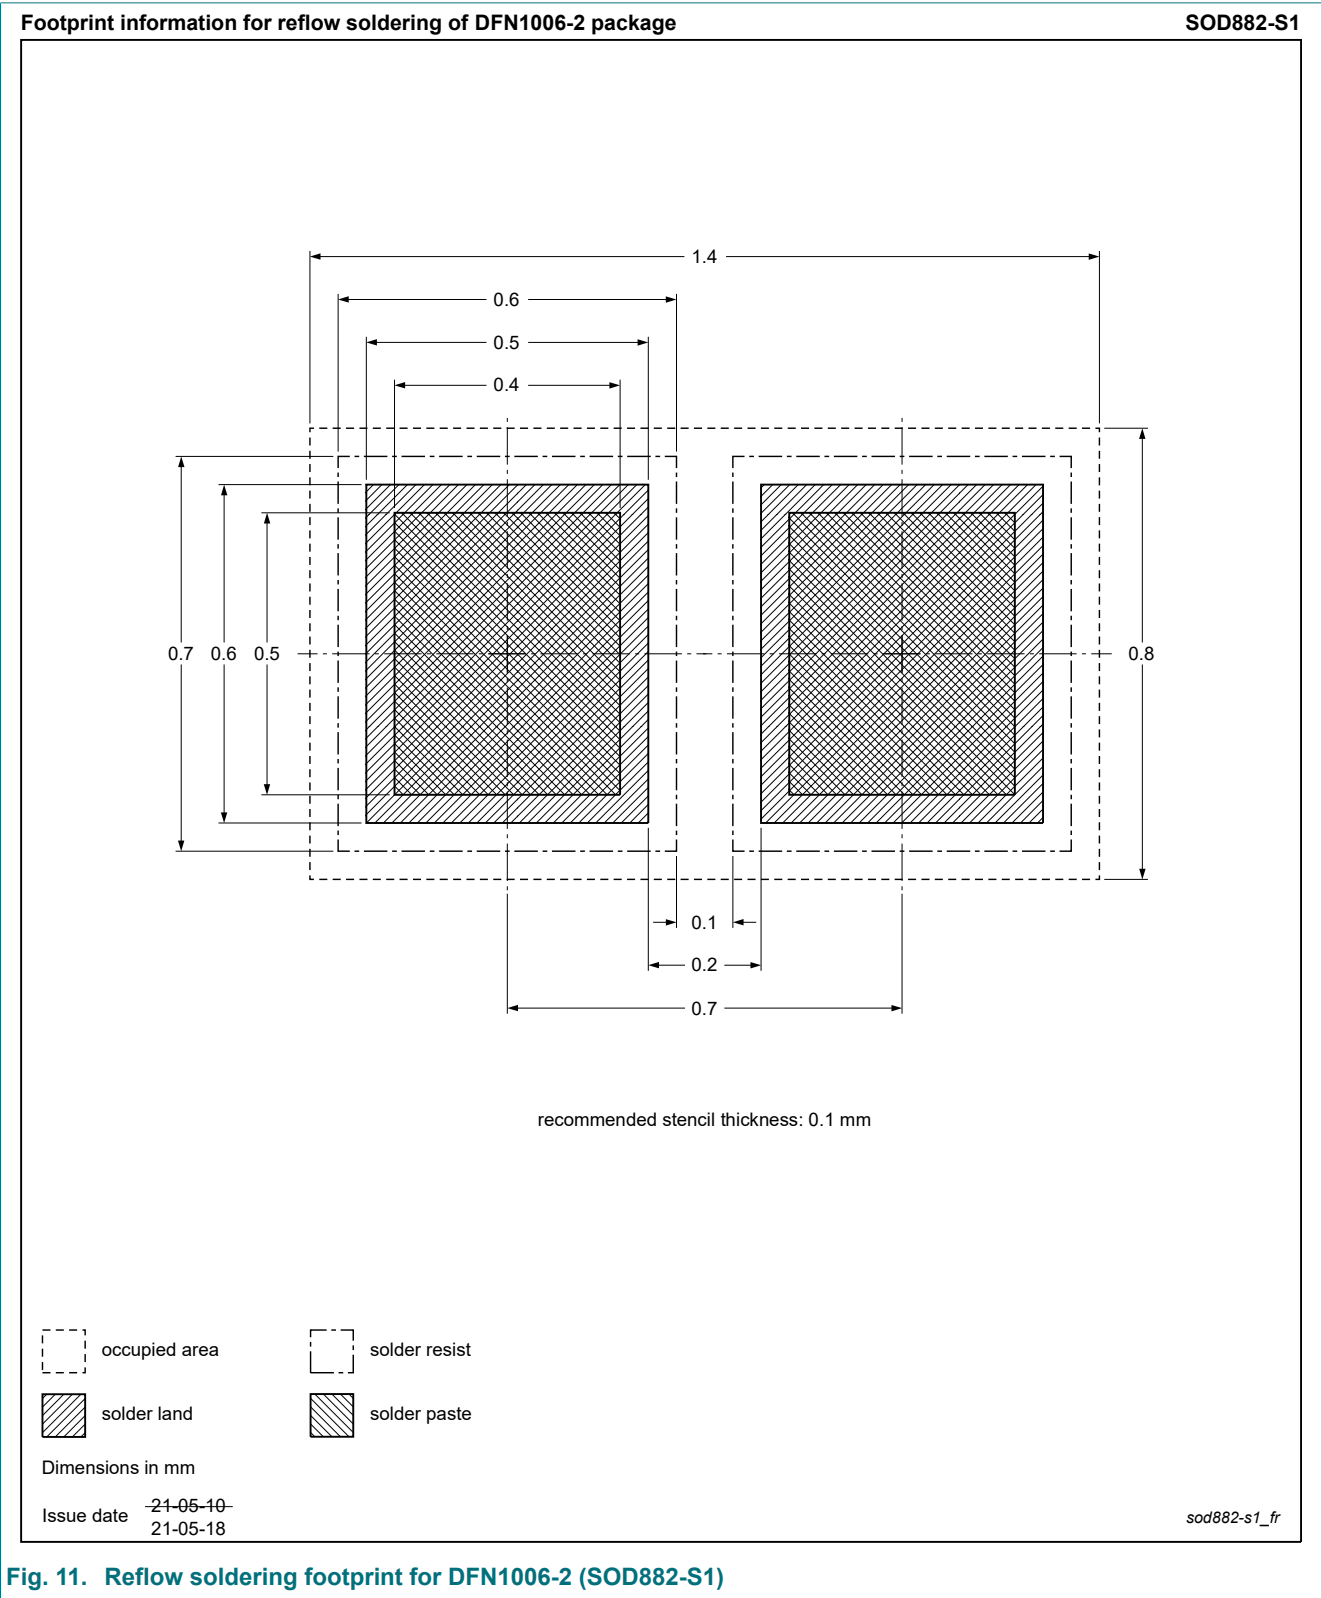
Reflow soldering footprint for DFN1006-2 (SOD882-S1)
